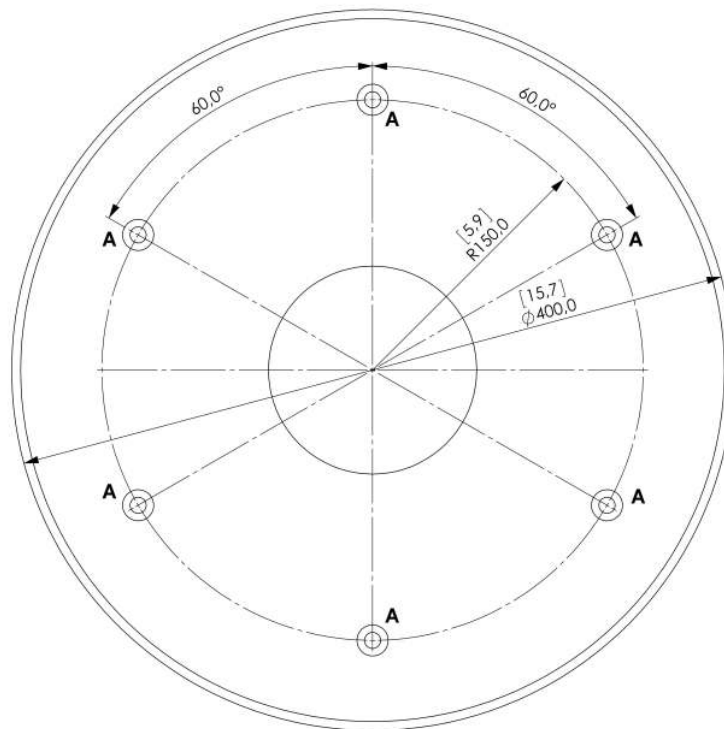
Scale drawing and hole pattern of the base plate (all dimensions in mm [inch])
